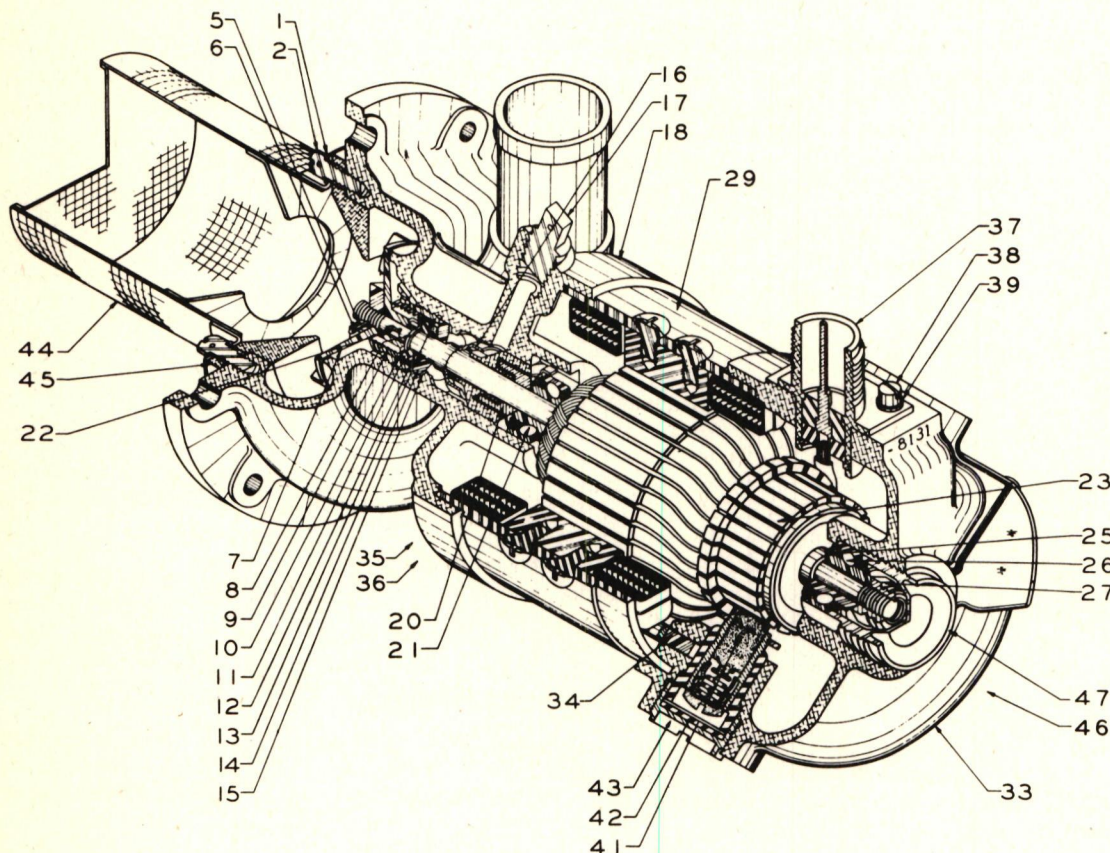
XVI - Fuel Booster Pump, Detailed Assembly
